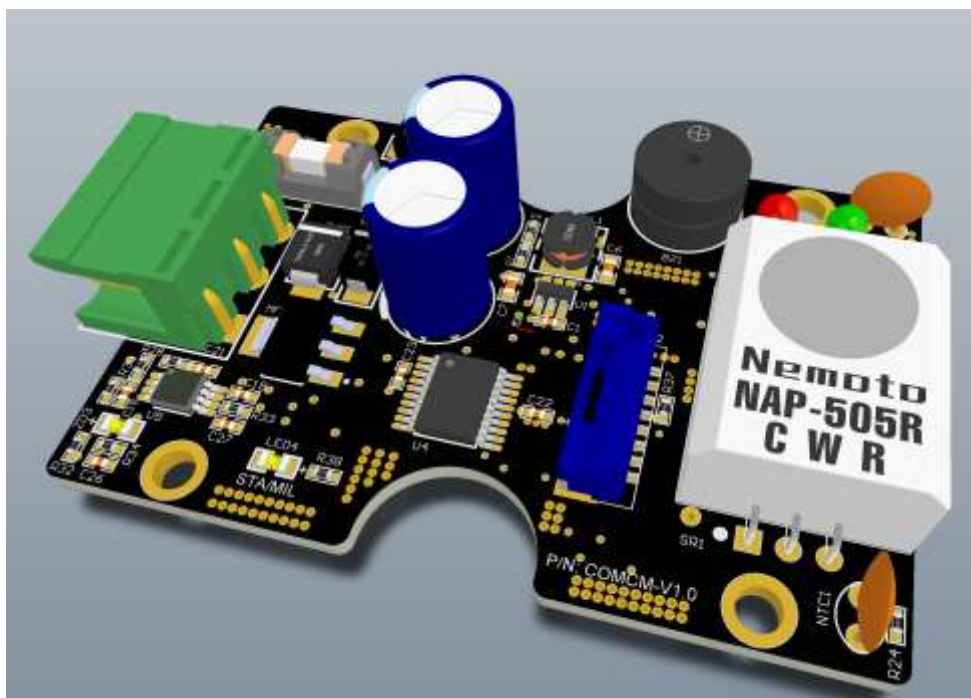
PCB 2D 3D design of Poisoning prevention device for unpowered internal combustion engines
